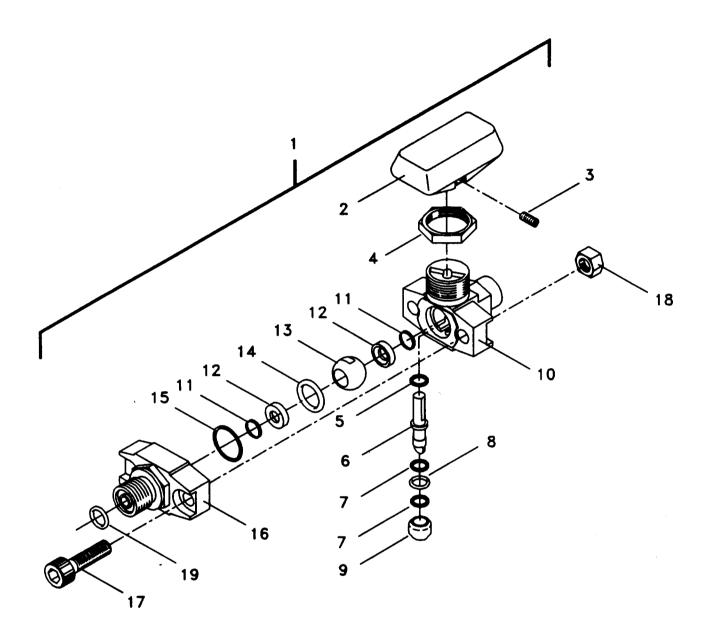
Diver Depth Gage and Console Pressure Gage Isolation Valve
